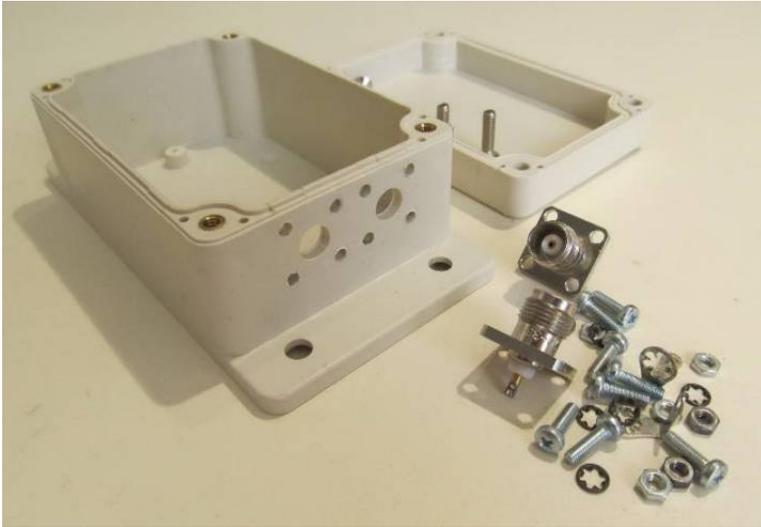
~ Choke enclosure ready for installation of TNC flange-mount connectors. All connector holes were cut with brad-point drill bits and deburred. ©2020 W. Reeve
